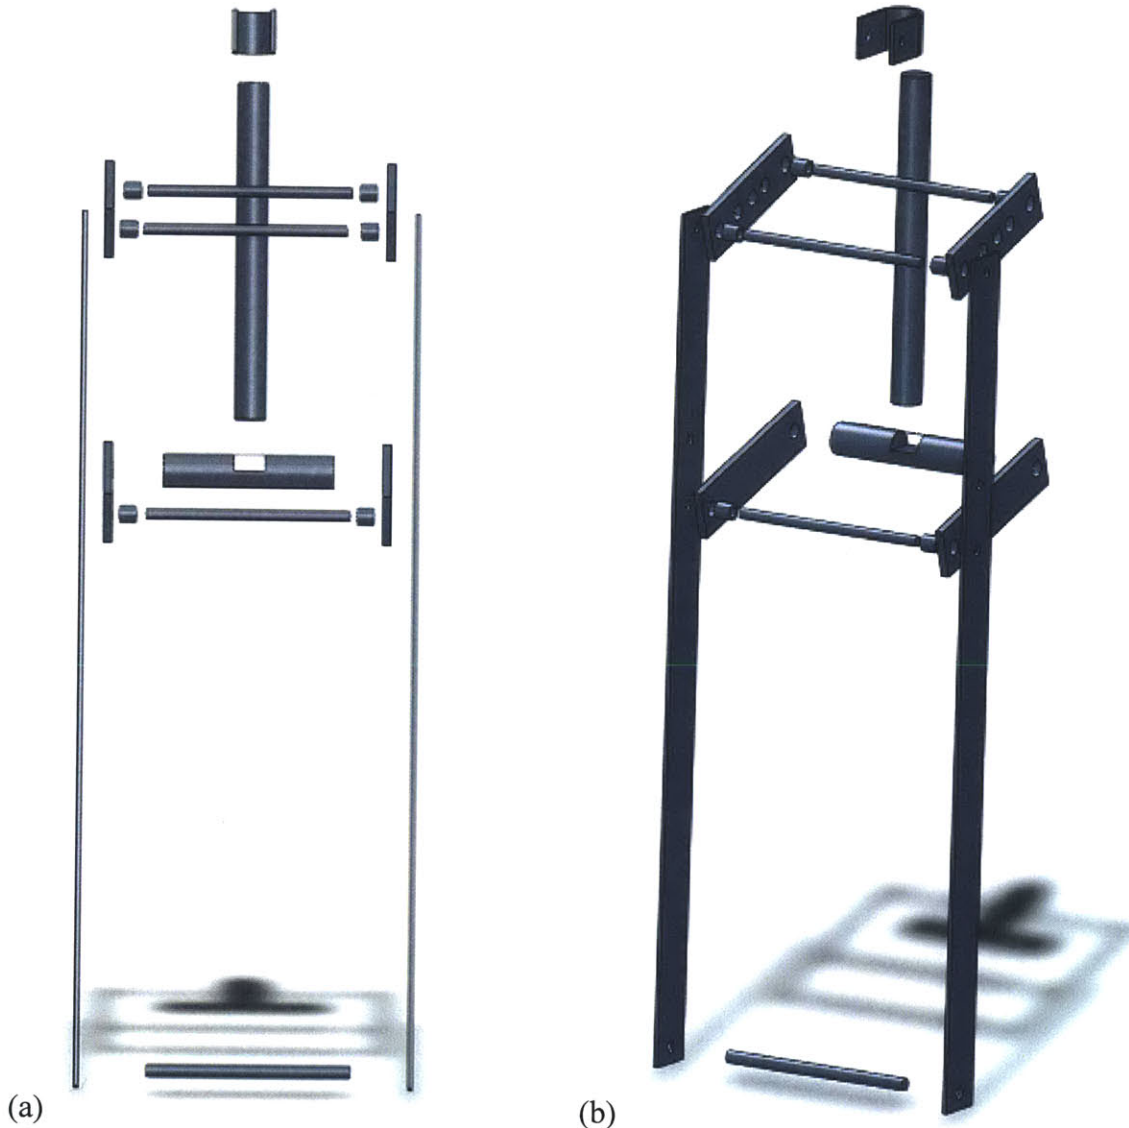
Isometric Drawing of Entire Suspension System. The front wheel axle is the bar in the lower left. The handlebars would attach to the steer tube, shown as the tube in the back and center of the structure.
